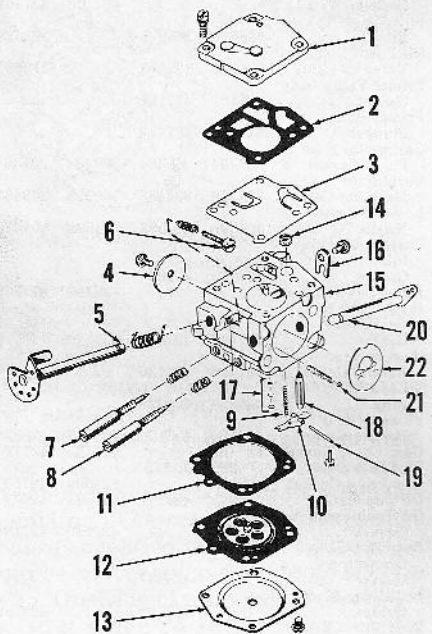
Exploded view of Tillotson HS carburetor. A check valve is installed at location (17) on models equipped with a fuel primer pump instead of the choke shown at (20, 21 & 22).
